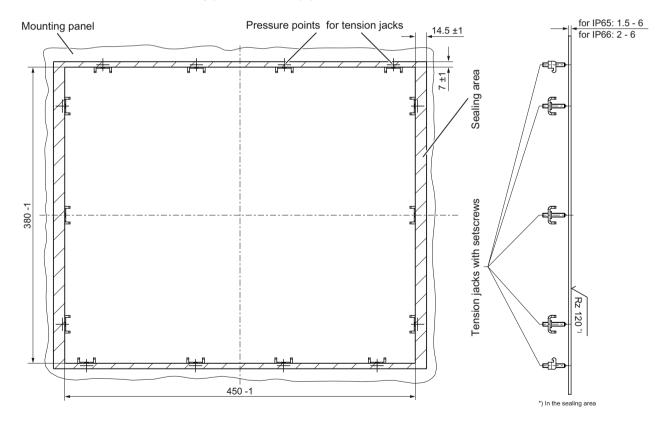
Dimension drawing for installing the OP 019 operator panel front
